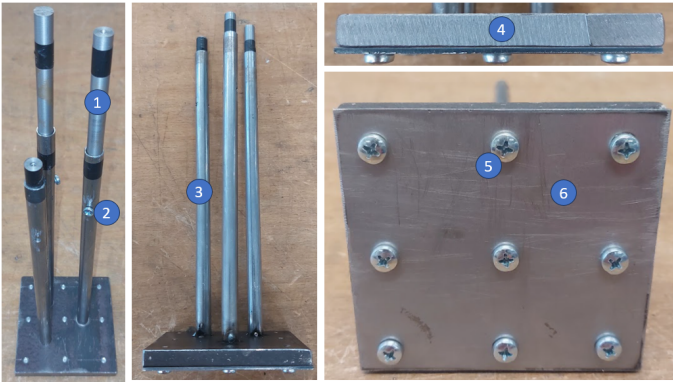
Second high-pressure melting setup: 1. Compressing Rod (3x), 2. Locking Bolts Ensuring Compressing Rod Locking (3x), 3. Compressing Tubes (3x), 4. Stability Block Welded to Compressing Tubes, 5. Closing Bolts for Closure Plate, 6. Closure Plate for Tube End Sealing.
